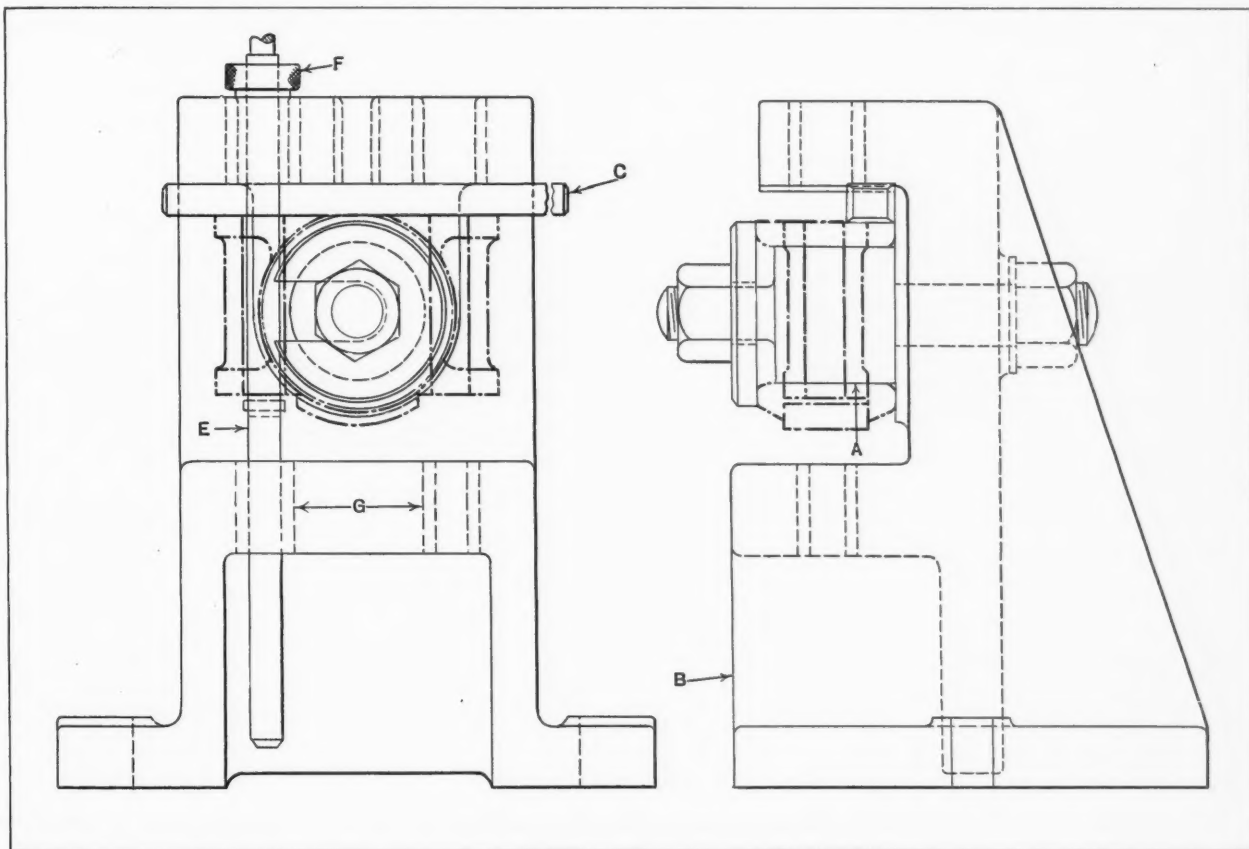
In this Jig, the Boring-bar is Supported near Both Ends of the Hole
